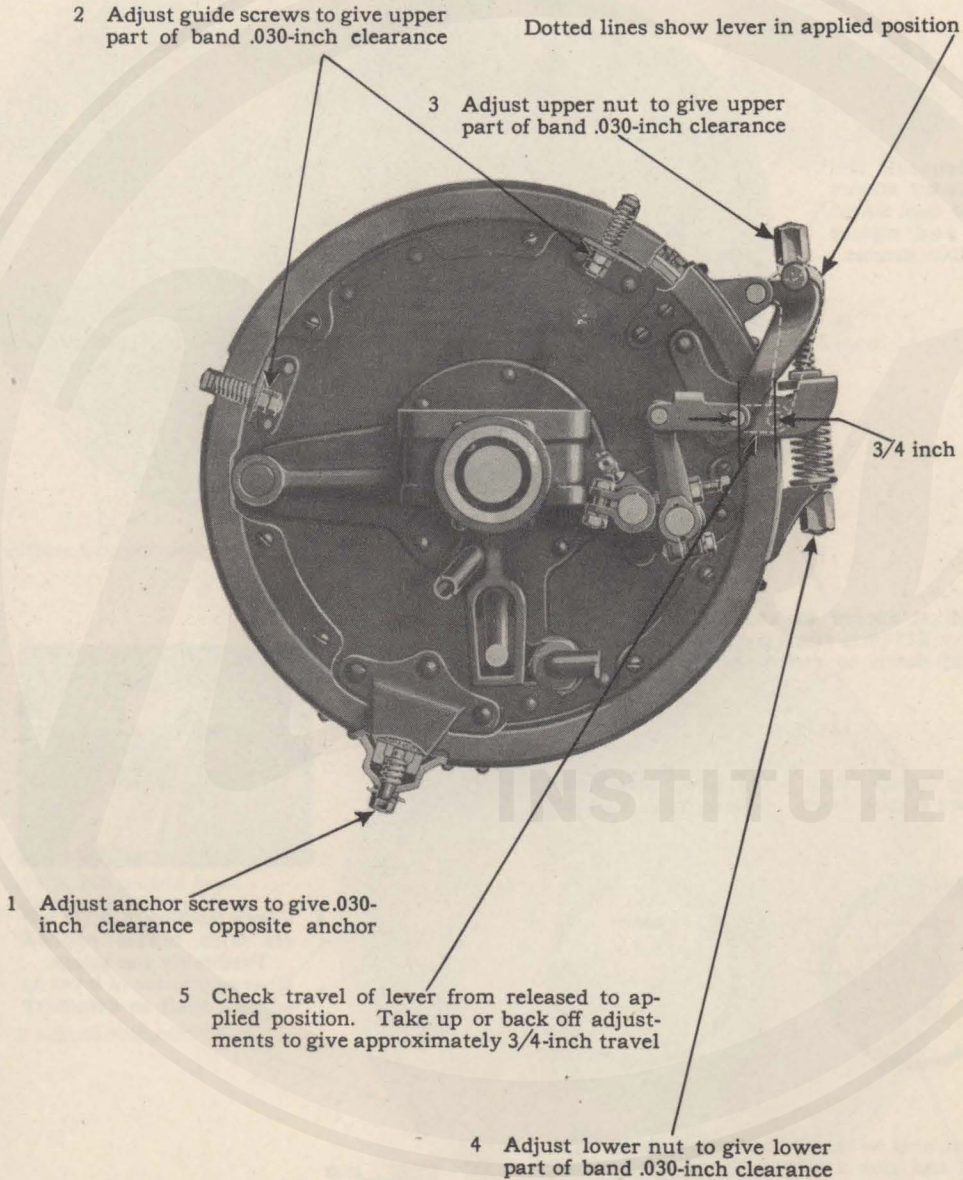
Adjustment of La Salle 303 rear foot brakes.
